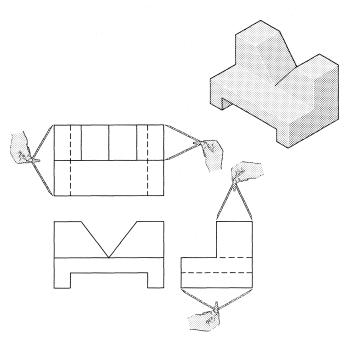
Transferring the Depth Dimension Using Dividers
